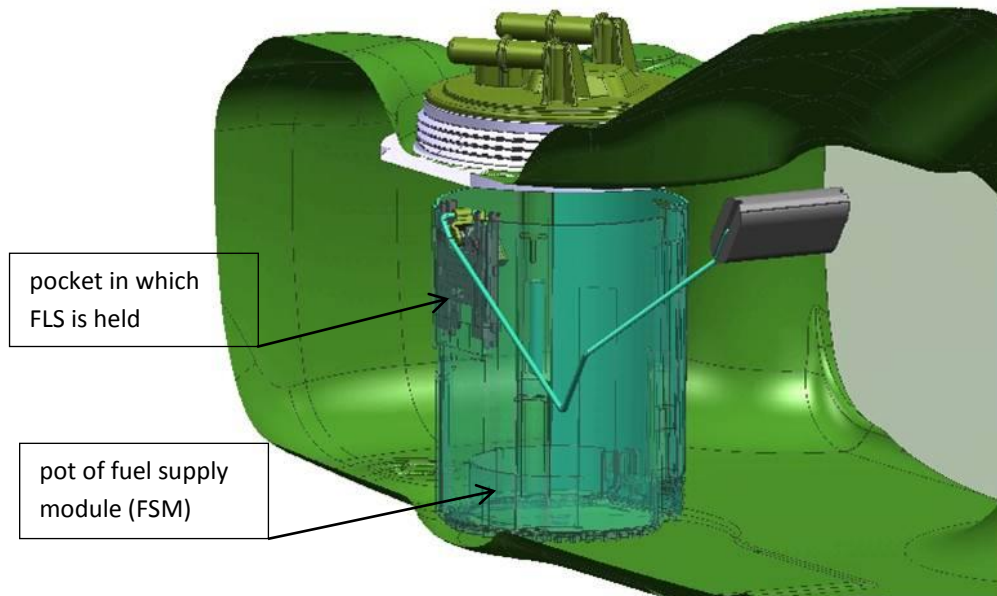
Arrangement of a fuel supply module and FLS inside of a fuel tank.
